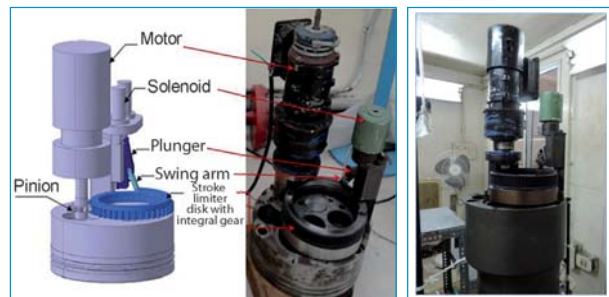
Schematic and photograph of stroke limiting device Fig. 2 Assembly of SLD with CSRDM
